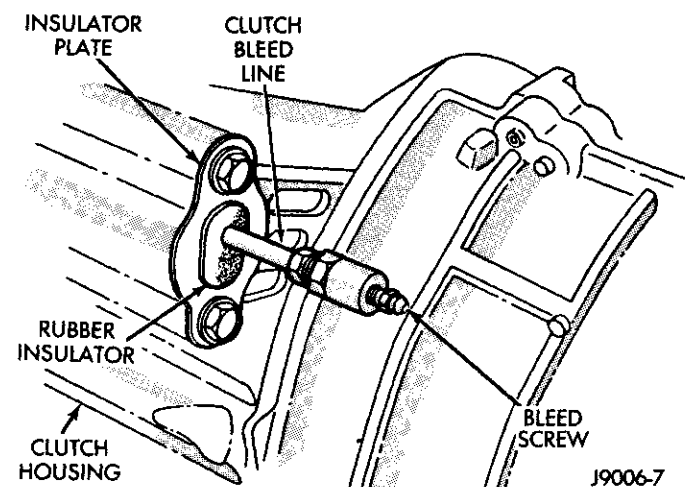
Insulator, Plate And Bleed Screw — 4-Cyl
